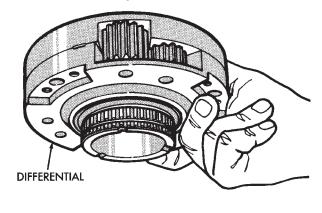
Installing Mainshaft Bearing Rollers and Spacers
